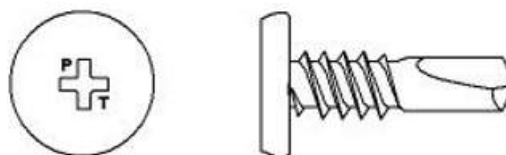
PPH PANCAKE FRAMER HEAD SCREW
